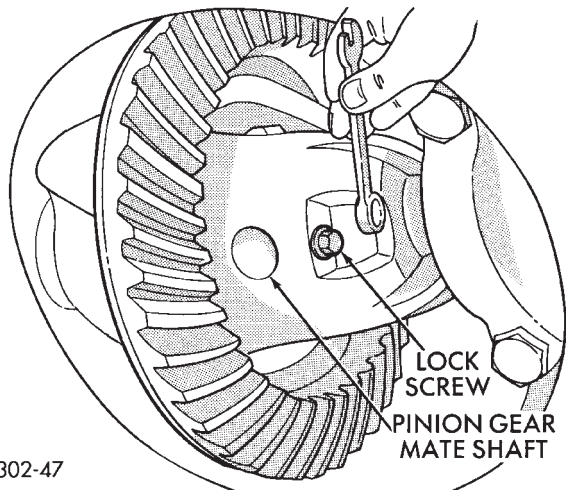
Pinion Gear Mate Shaft Lock Screw
